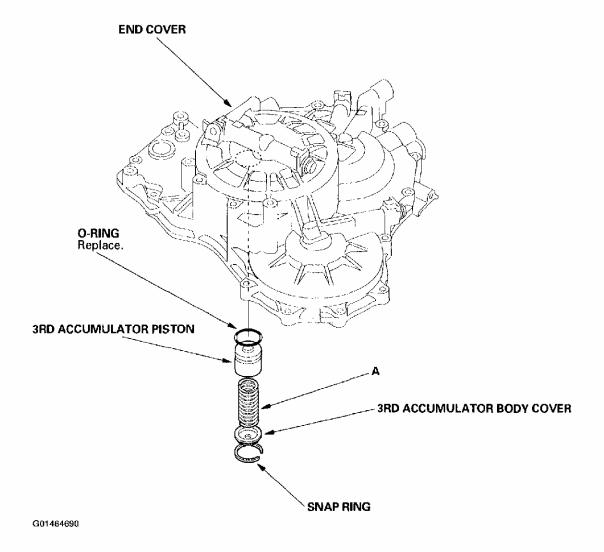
Exploded View Of The 3rd Accumulator & End Cover Assembly Courtesy of AMERICAN HONDA MOTOR CO., INC.
